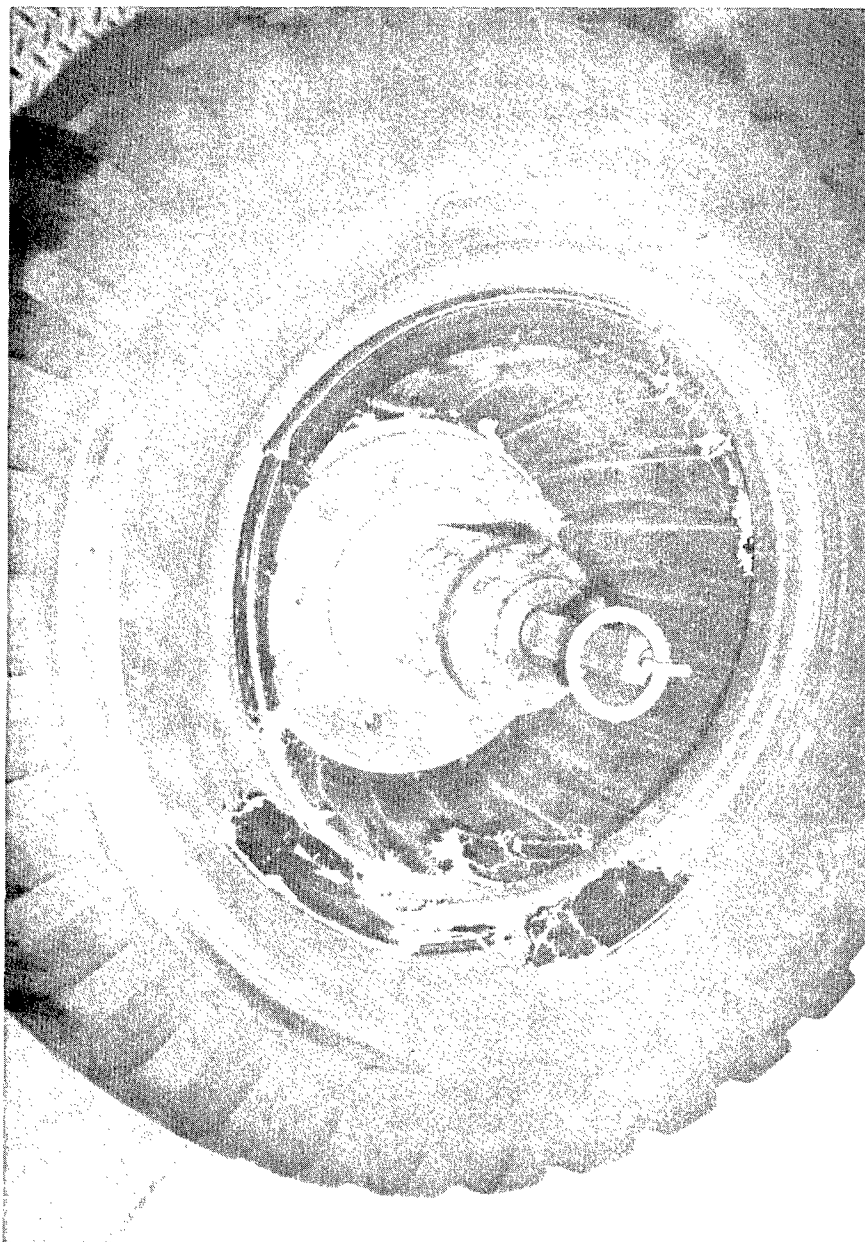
Sample A Failure Showing Overall View of Tire and Rim Assembly.
